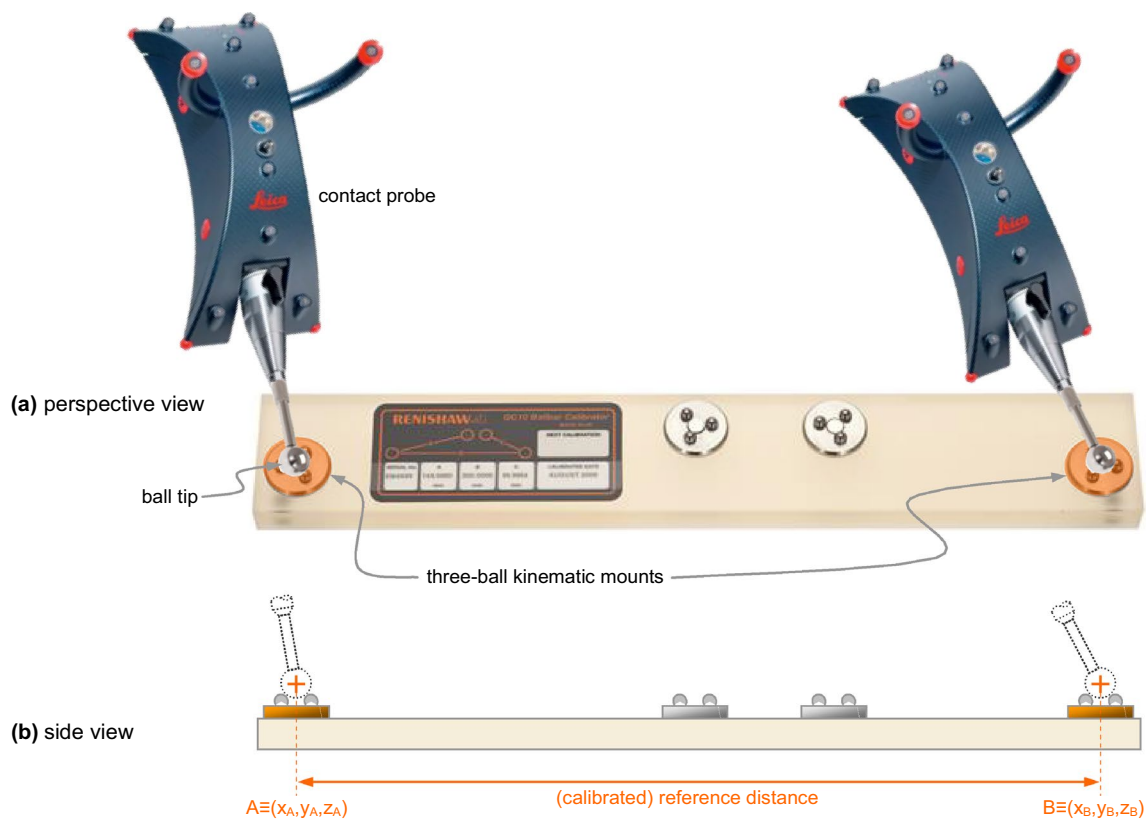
Schematic example of performing structured tests using a contact probe (like T-probe or mini-vector) and the scale bar in Fig. 6. a perspective view and b side view
